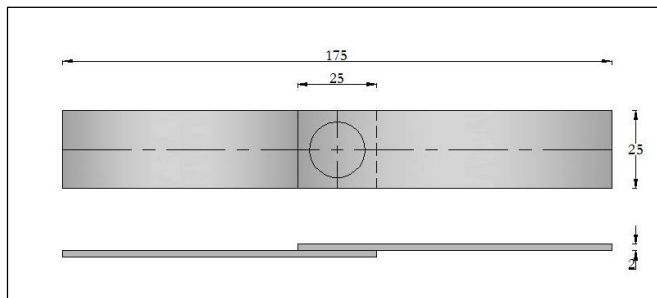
Dimensions of the overlap specimen that to be welded (All dimensions in mm)
